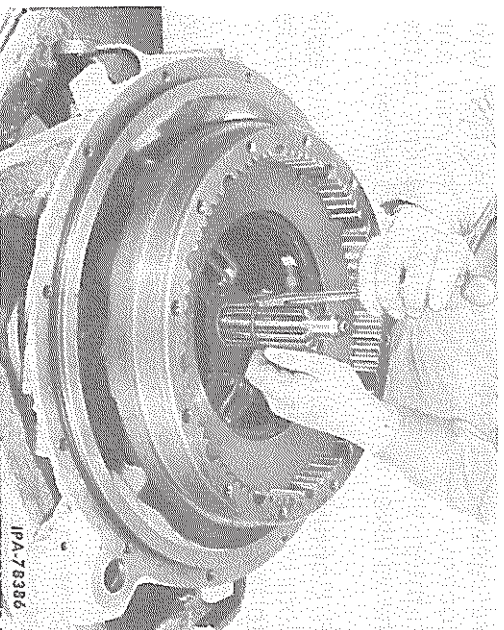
Installing the Splined Center and Disc Assembly Positioning Snap Ring
